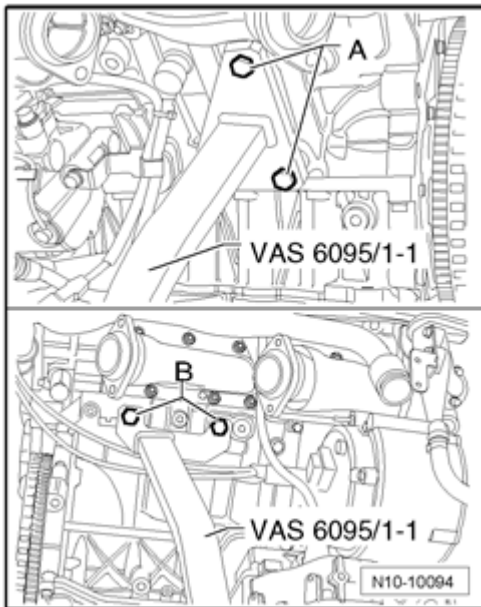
Identifying Brackets For W12 Engine VAS 6095/1-1 Can Now Be Secured To Cylinder Block On Left/Right
